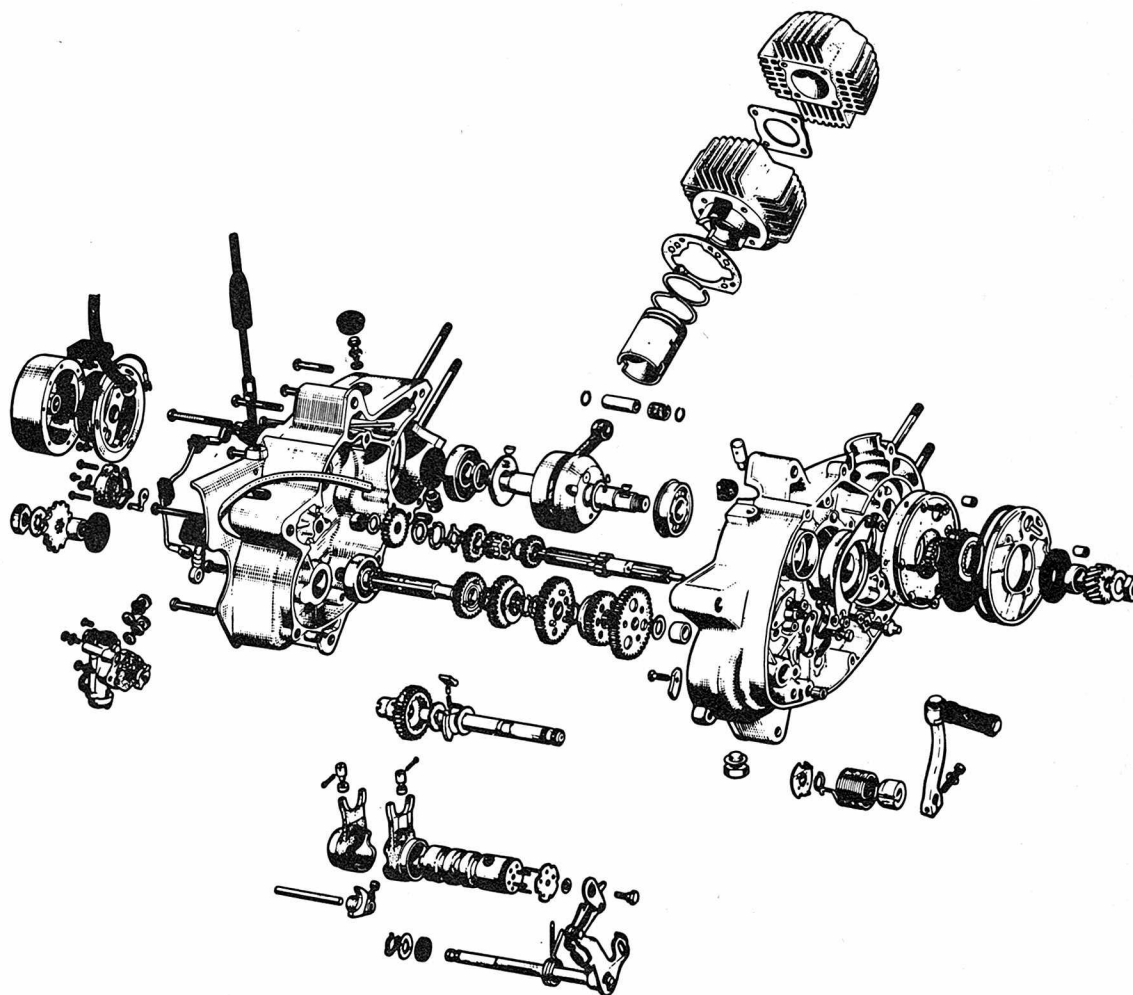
Exploded view of engine assembly typical of rotary valve 50cc models.
